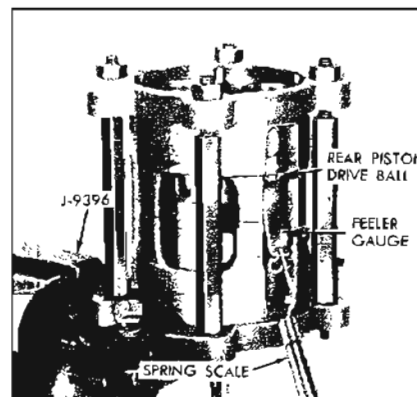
Checking "Drag" on Selected Feeler Gauge Leaf with Spring Scale
